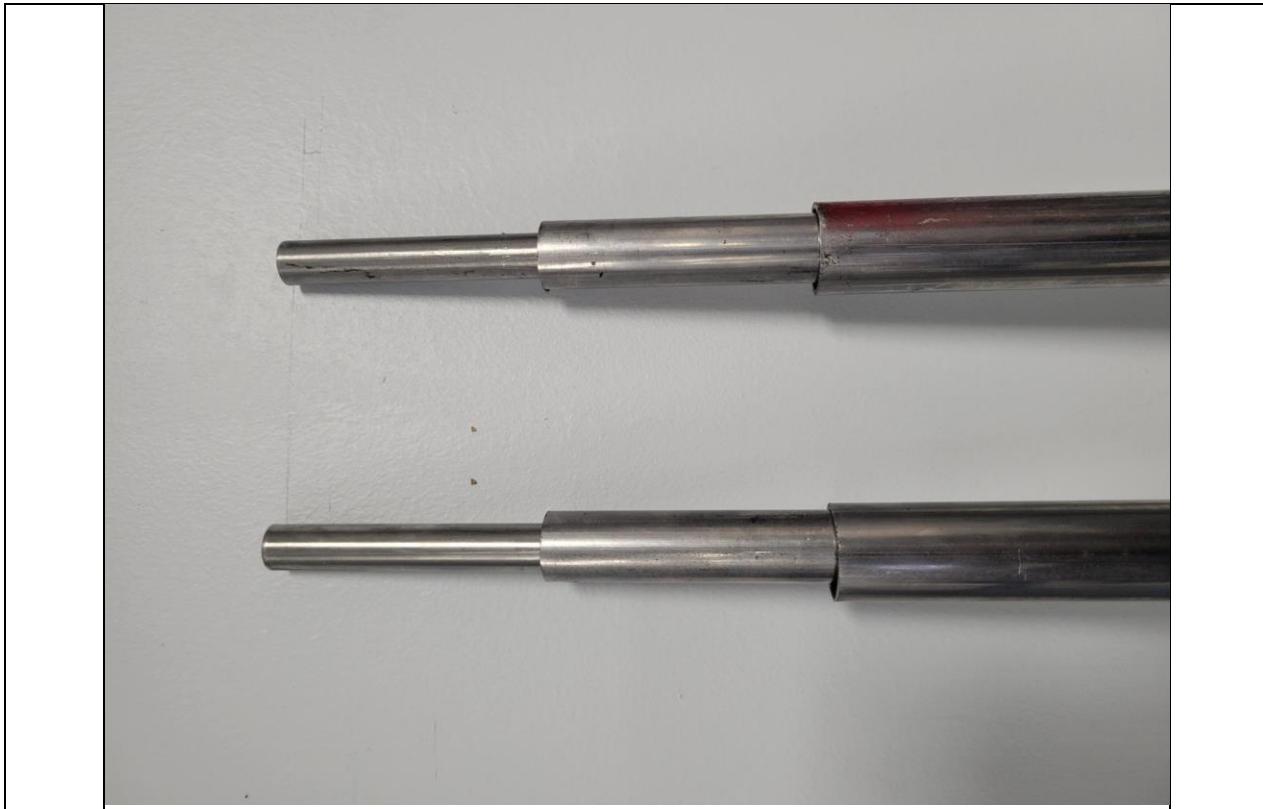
Cut 304 Stainless Steel tubes – for nested-nozzles.
